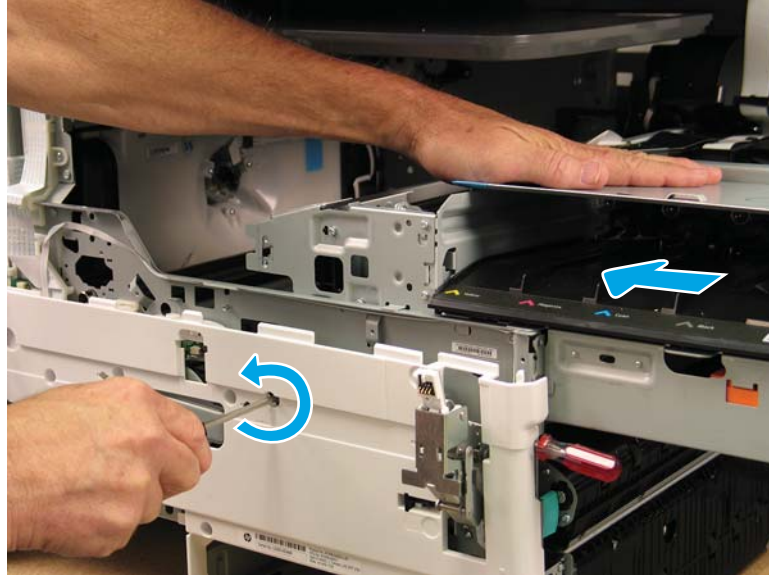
Disengage the wiper engagement racks from the drive wheels
